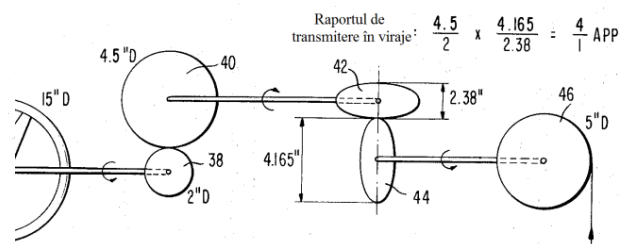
Transmission sketch of non-circular gears in the opposite extreme position (90° rotary gear) [62]
